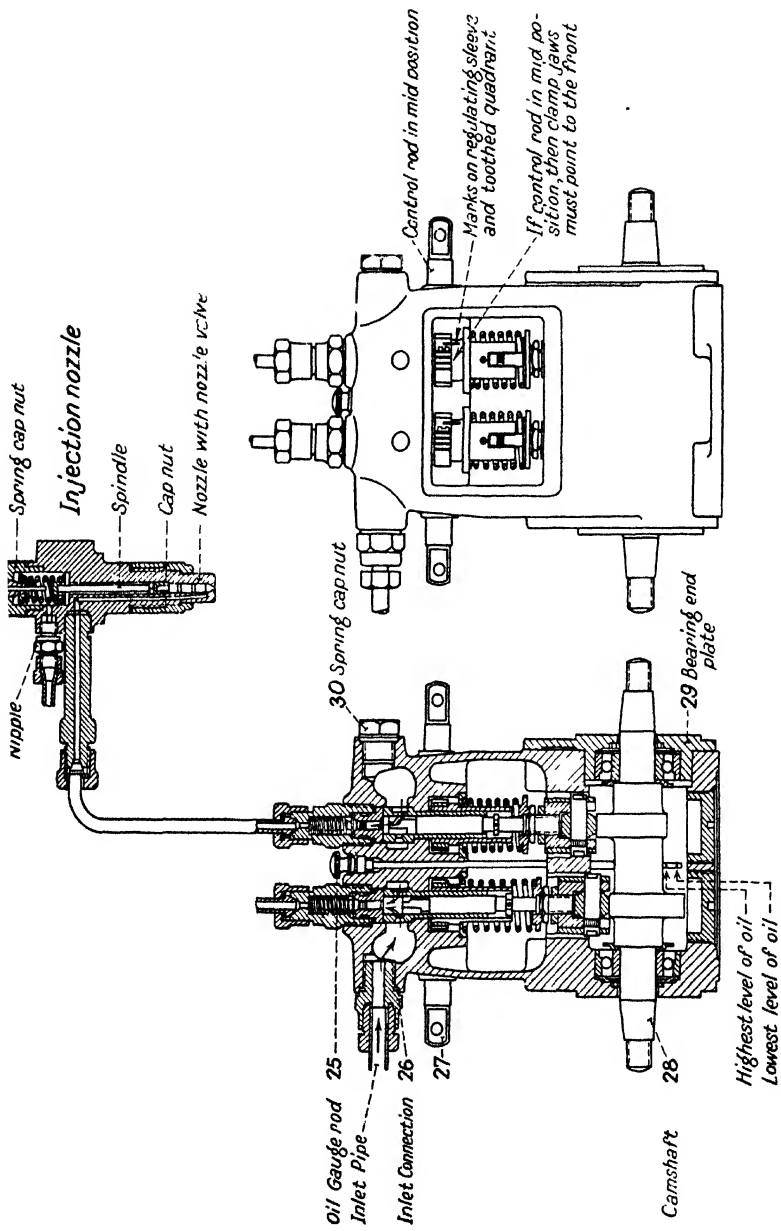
The C.A.V.-Bosch Two Cylinder Fuel Pump, showing above, the Injection Nozzle and Connecting Pipe.
